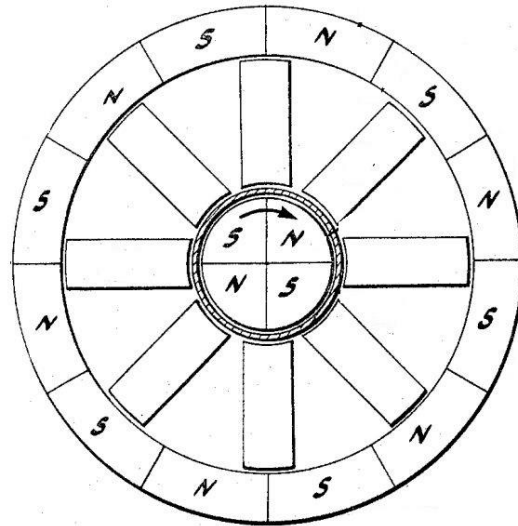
Radial magnetic gear with pole piece rotor [63]
